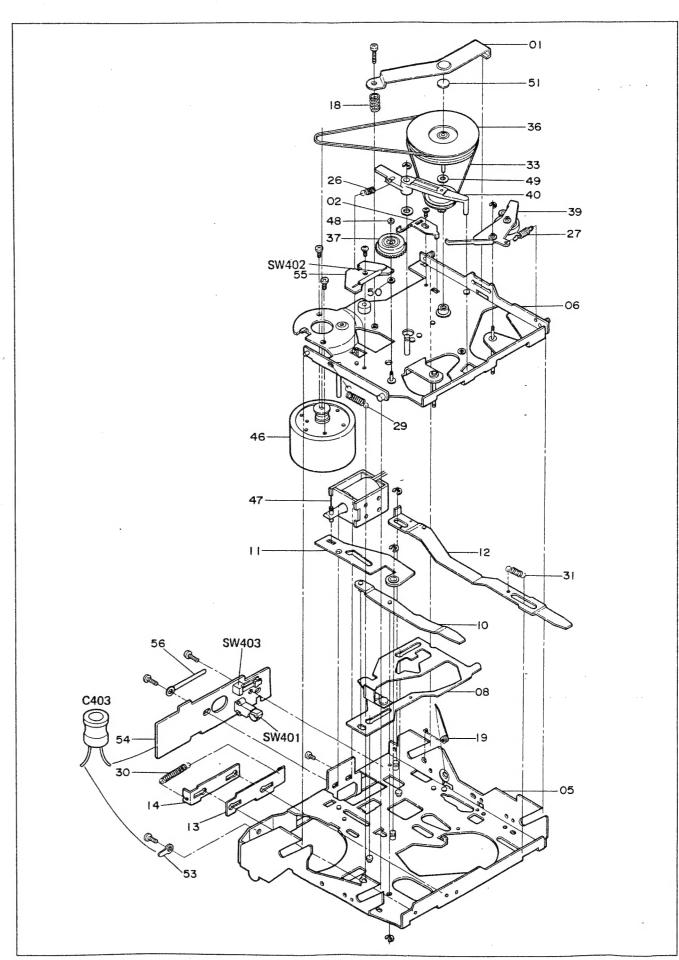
MECHANISM EXPLODED VIEW (LOWER SIDE)
